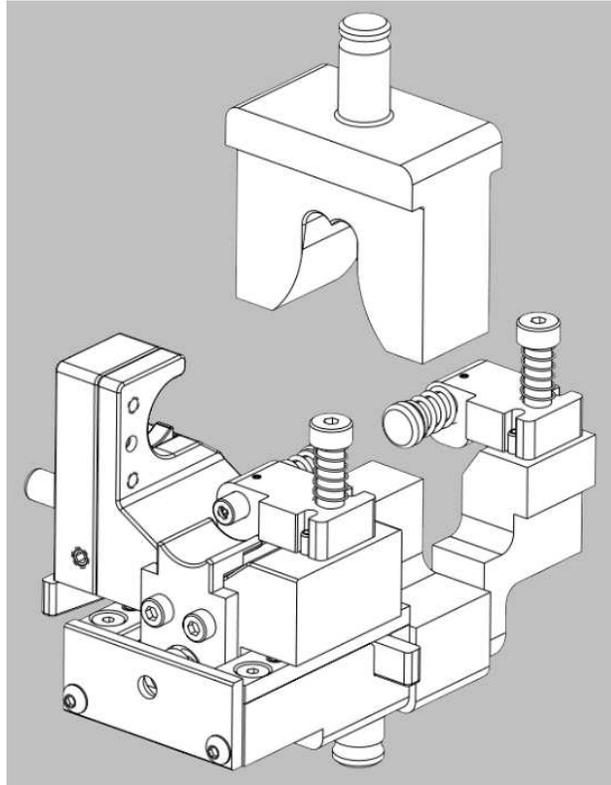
Crimping Die Assemblies for Circle Contact 90° Version
